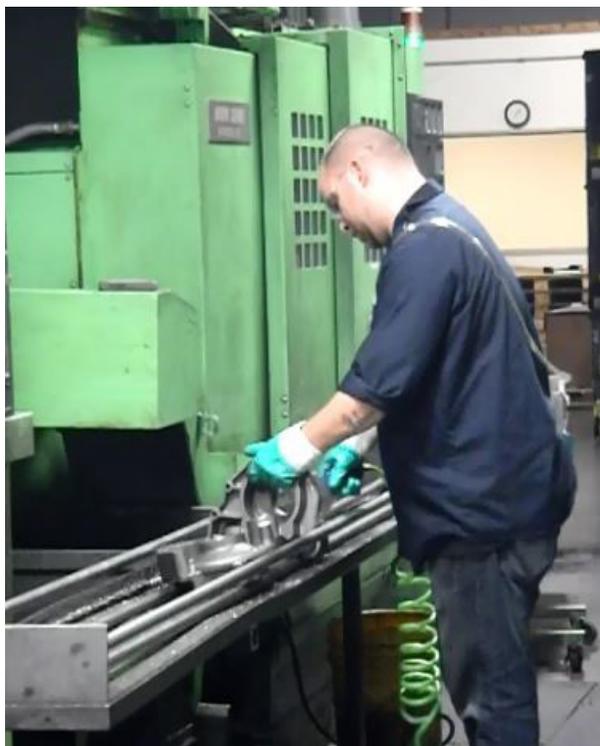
Machine operator holds a part in his gloved left hand, while blowing it off with the compressed air gun held in his gloved right hand. Photo by NIOSH.
